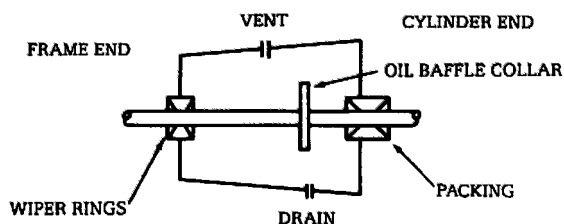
Extended-length single-compartment distance piece. No portion of the piston rod that enters the packing will enter the frame oil wiper rings. (*Dresser-Rand Company, Painted Post, N.Y.*)
